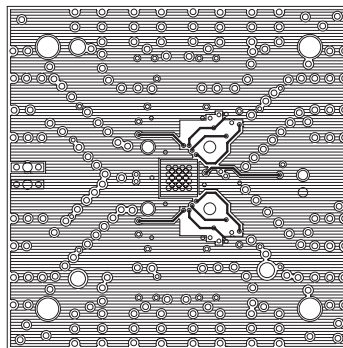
SKY73085-11 Evaluation Board Assembly Diagram
